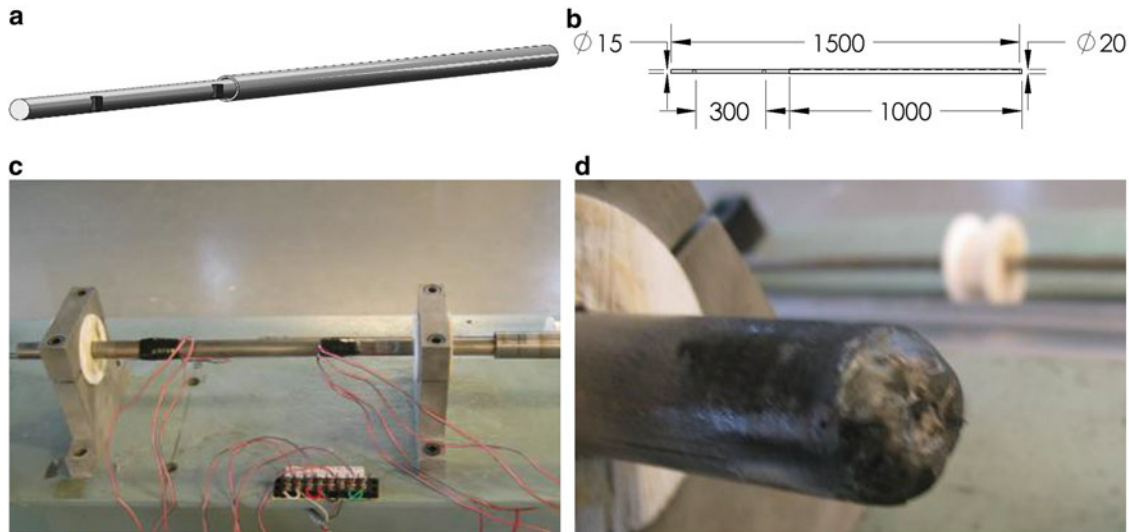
Schematic of the serpentine bar (a, b). Front half of the two pass bar (c) and close-up of the welded joint at the far left of the serpentine bar (d)
